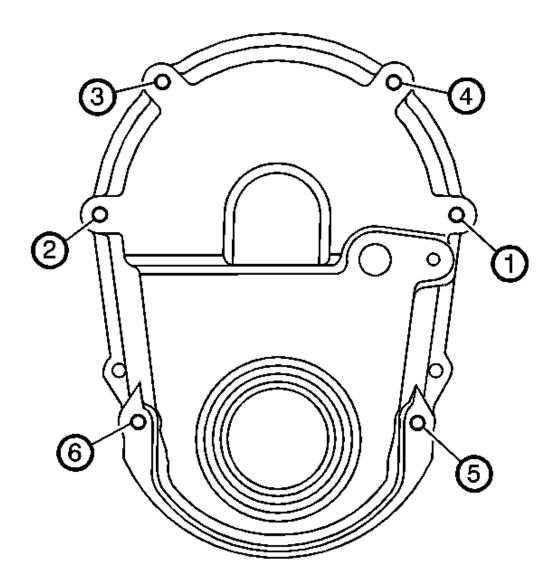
Crankshaft Front Cover Bolt Tightening Sequence Courtesy of GENERAL MOTORS CORP.
